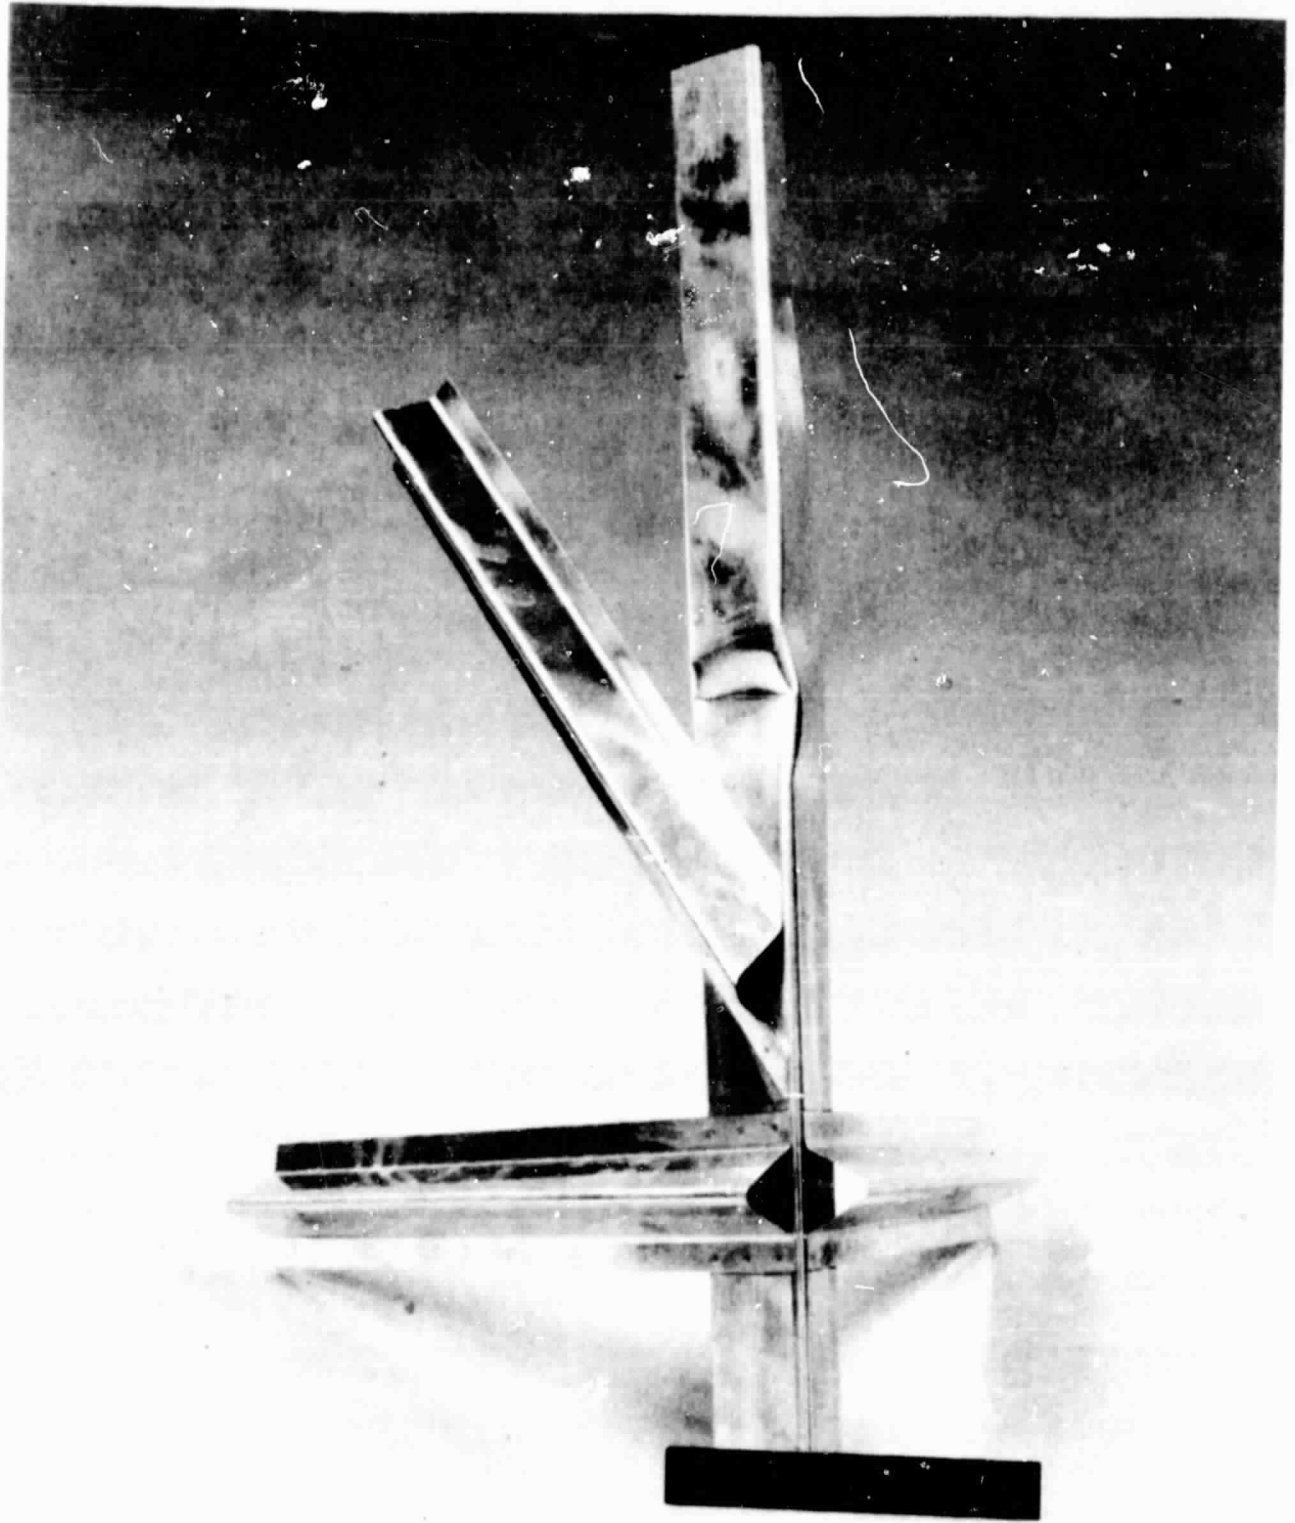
Six Weld/Joint Test Specimen
